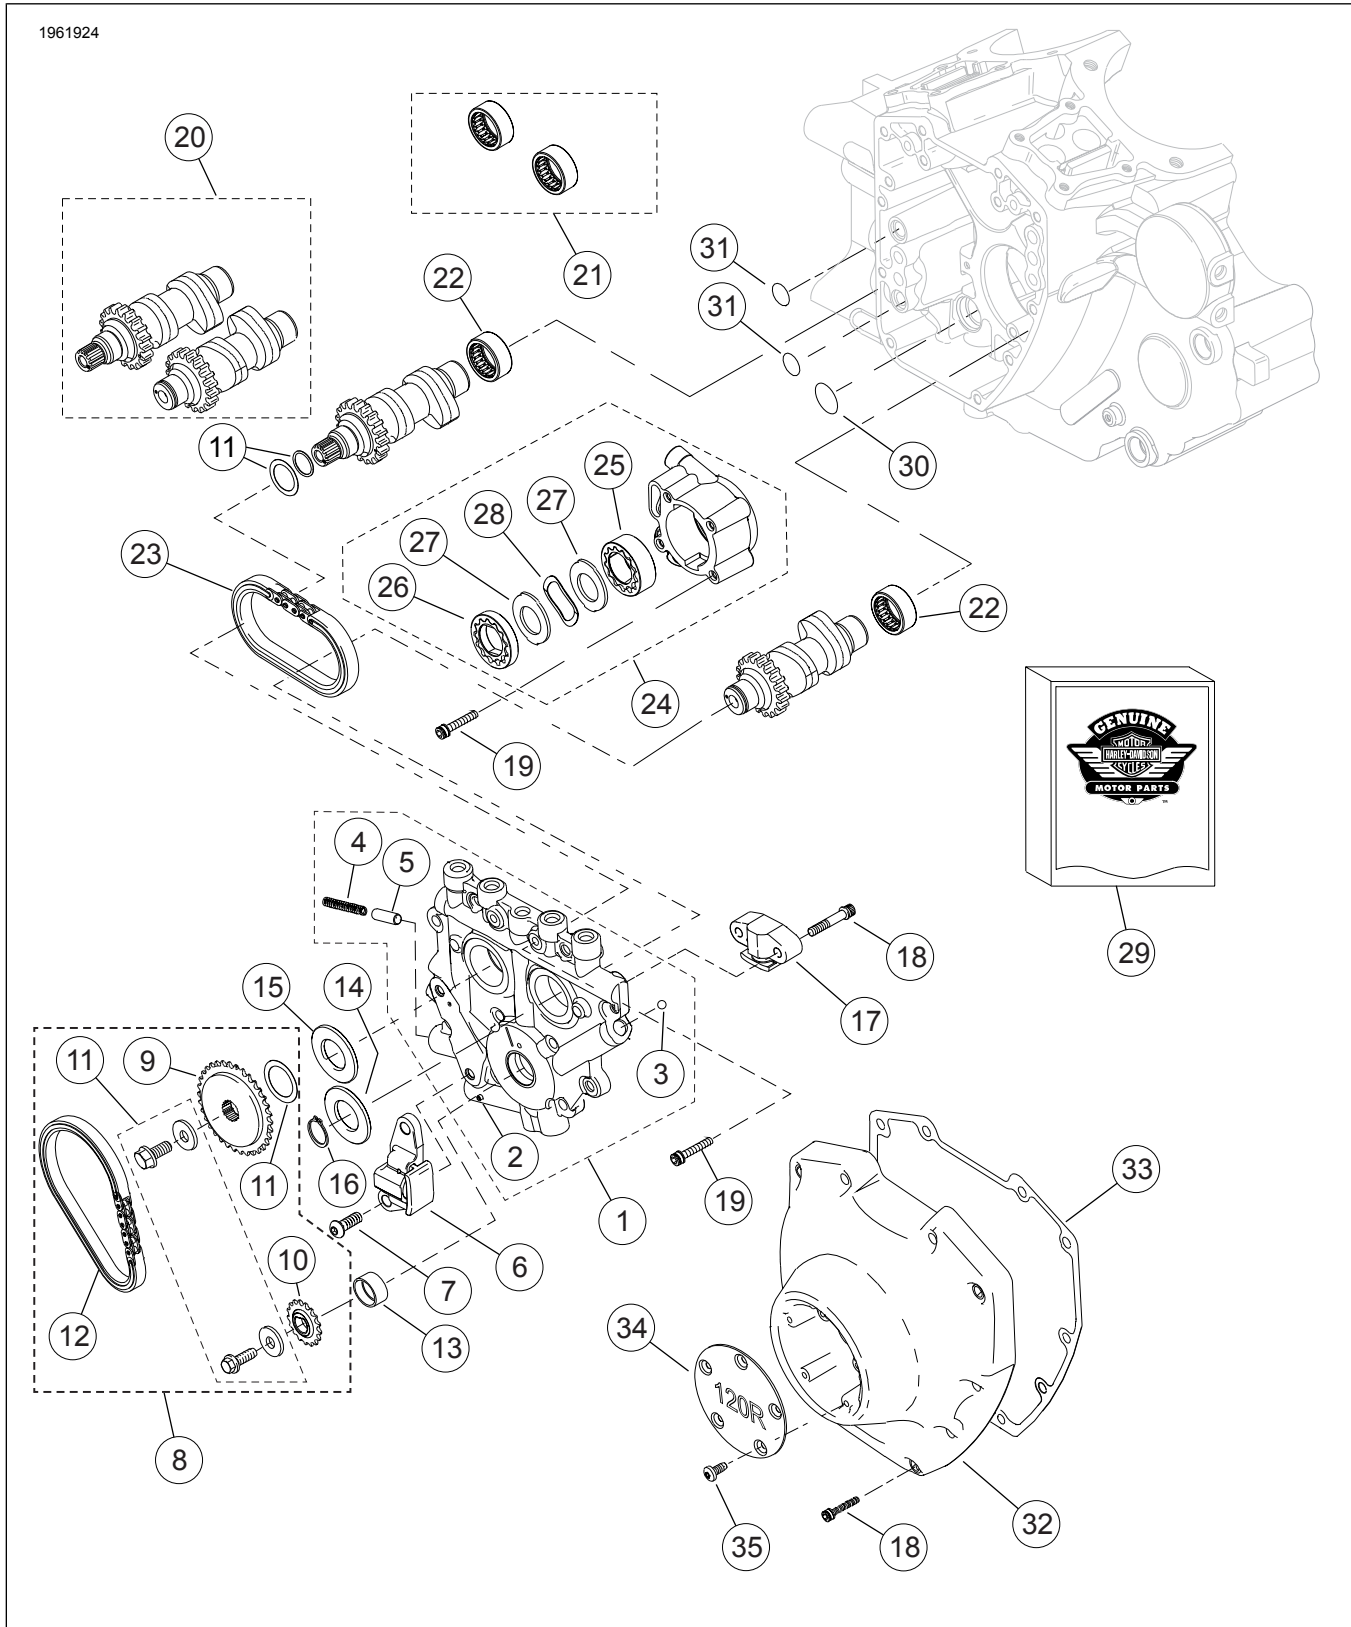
SE120R Screamin' Eagle Pro Crate Engine (Beta) Camshafts at Camshaft Cover
